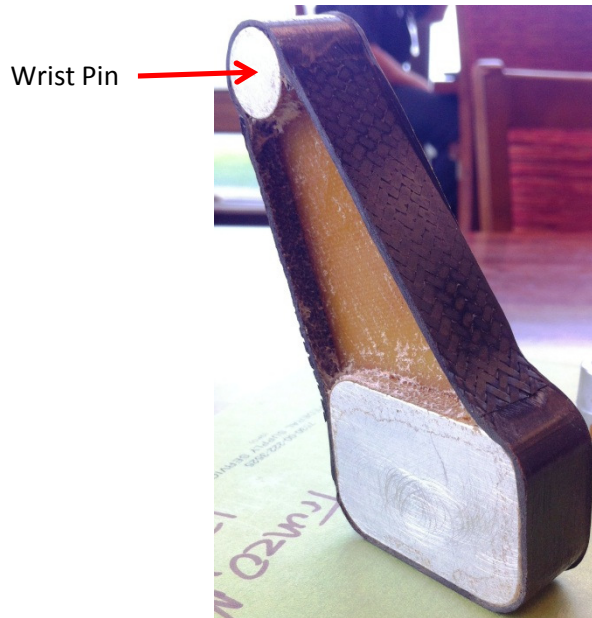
Hybrid Material Composite Connecting Rod Pre-Machining
